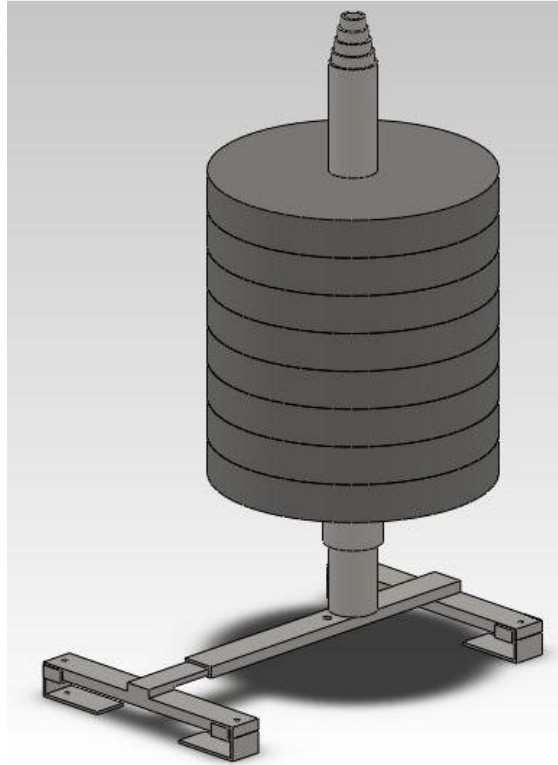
Weight assembly for fatigue test. The 8 plate weights each weigh 25lbs equaling a total of 200lbs. The telescoping feature is seen at the top of the figure. The board secure depicts the “wings” that hold the board at the four corners of the board. It also shows how it is able to telescope lengthwise.
